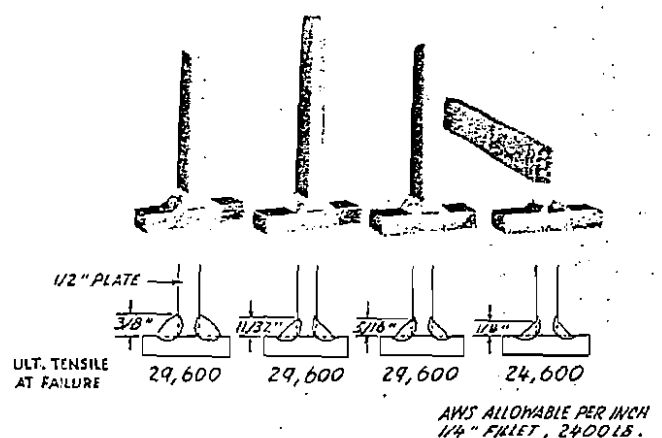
One rule of thumb says fillet size should equal $\frac{3}{4}$ plate thickness to develop full plate strength. Using this method, a $\frac{3}{8}$ " fillet weld on $\frac{1}{2}$ " plate should "beat the plate". But so did $\frac{11}{32}$ " and $\frac{5}{16}$ " fillets. Not until fillet size was reduced to $\frac{1}{4}$ " did weld failure occur . . . at a stress of 12,300 lbs/linear in., more than 5 times the AWS allowable.
